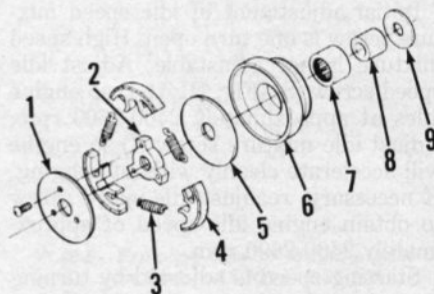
Exploded view of clutch used on DM-50 Multi-Purpose Saw.
